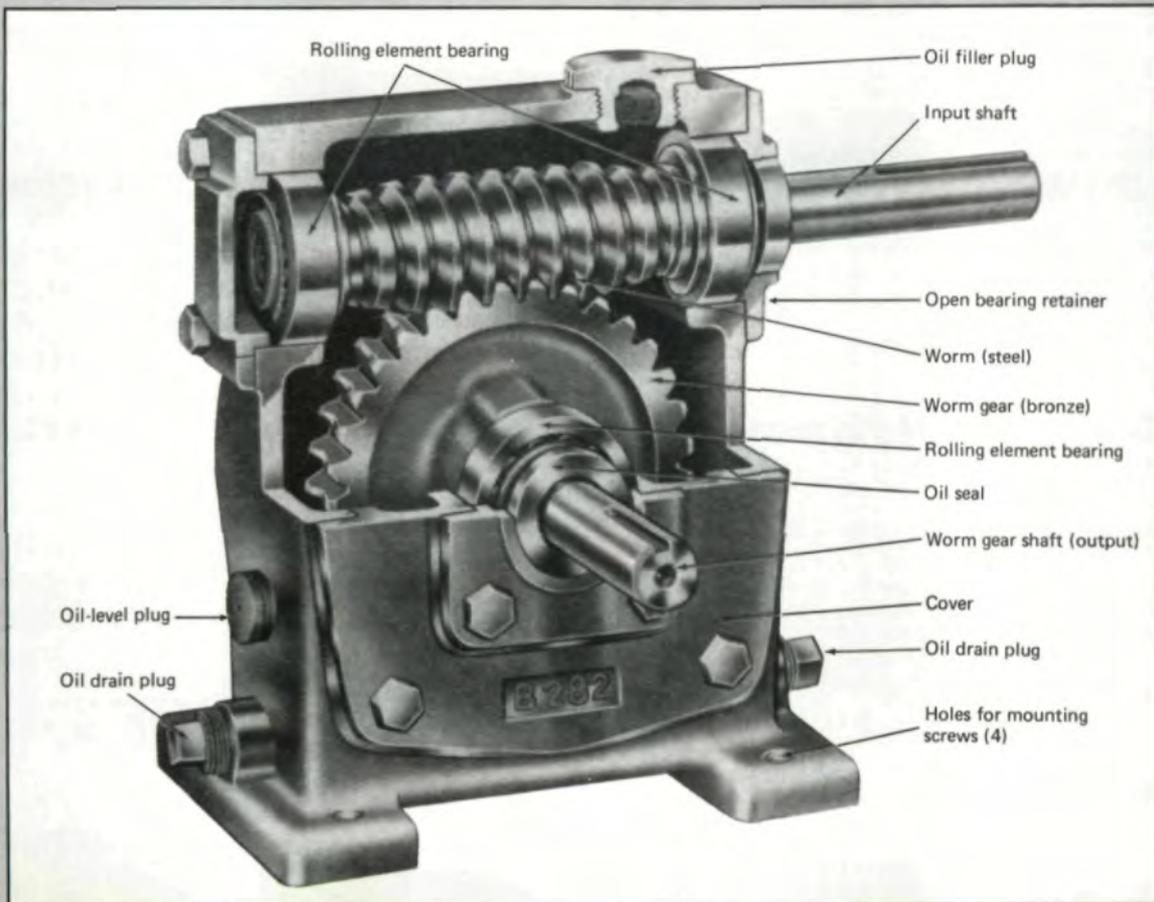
Typical medium-size worm gear speed reducer. (Courtesy of Morse Industrial Corp., subsidiary of Emerson Electric Co.)
